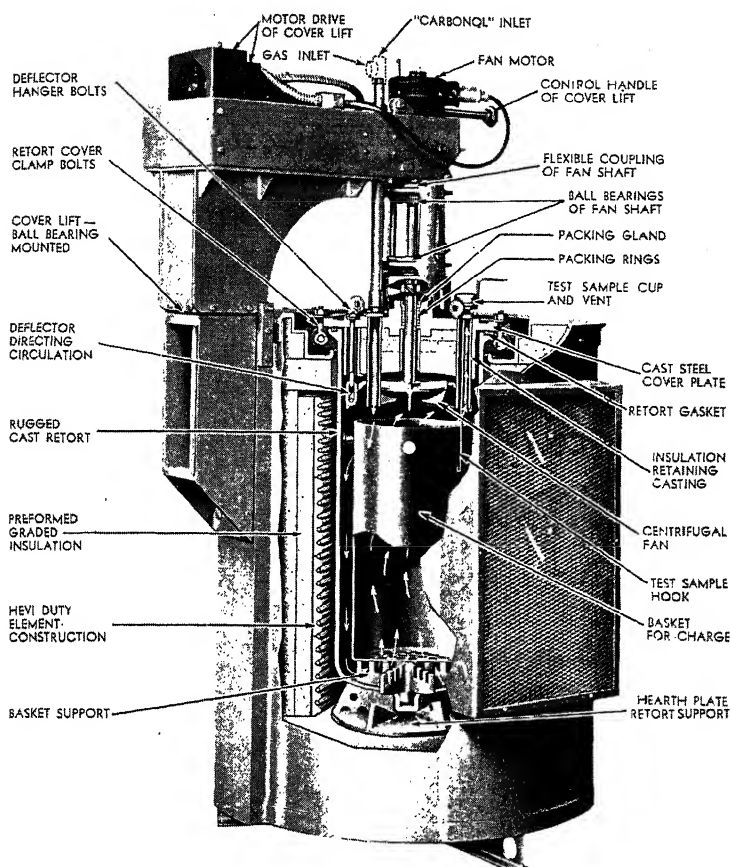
Gas carburizing furnace. (Courtesy Hevi Duty Electric Company.)
